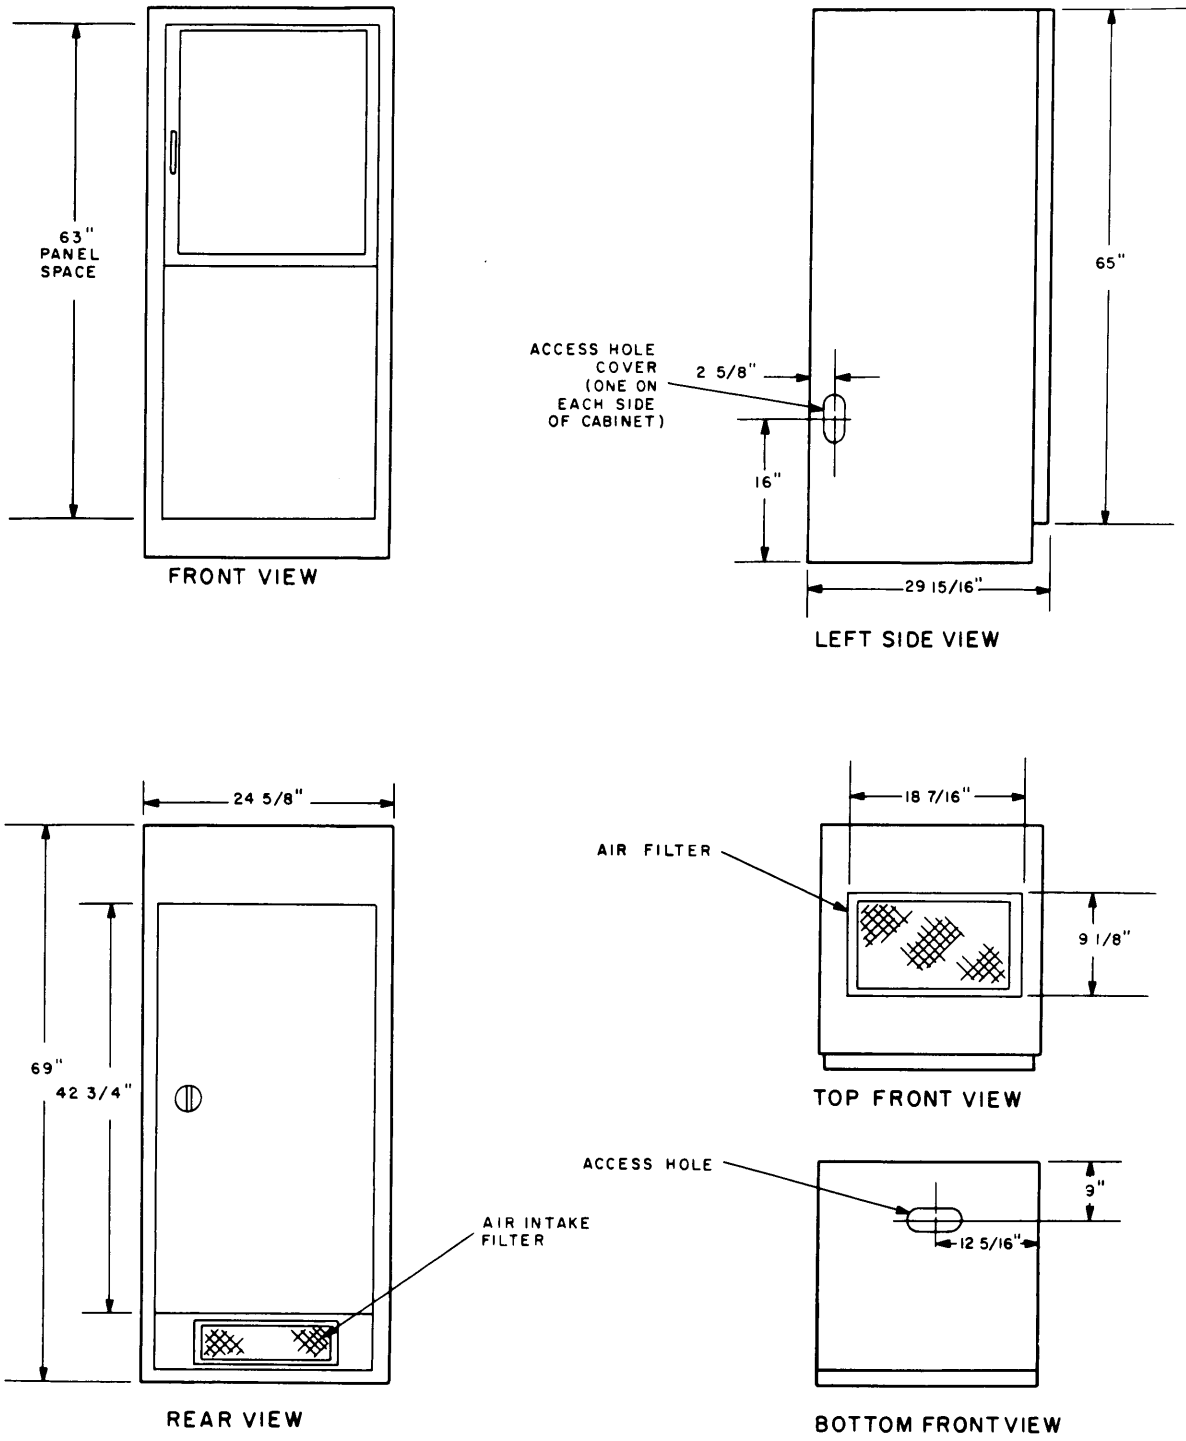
DDR-5A, Dimensional Outline Drawing
